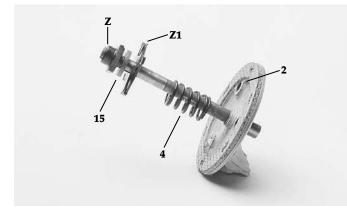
Inner drive plate (2) and parts carried on its hollow shaft. Z is the adjusting nut to adjust the servo clearance.
